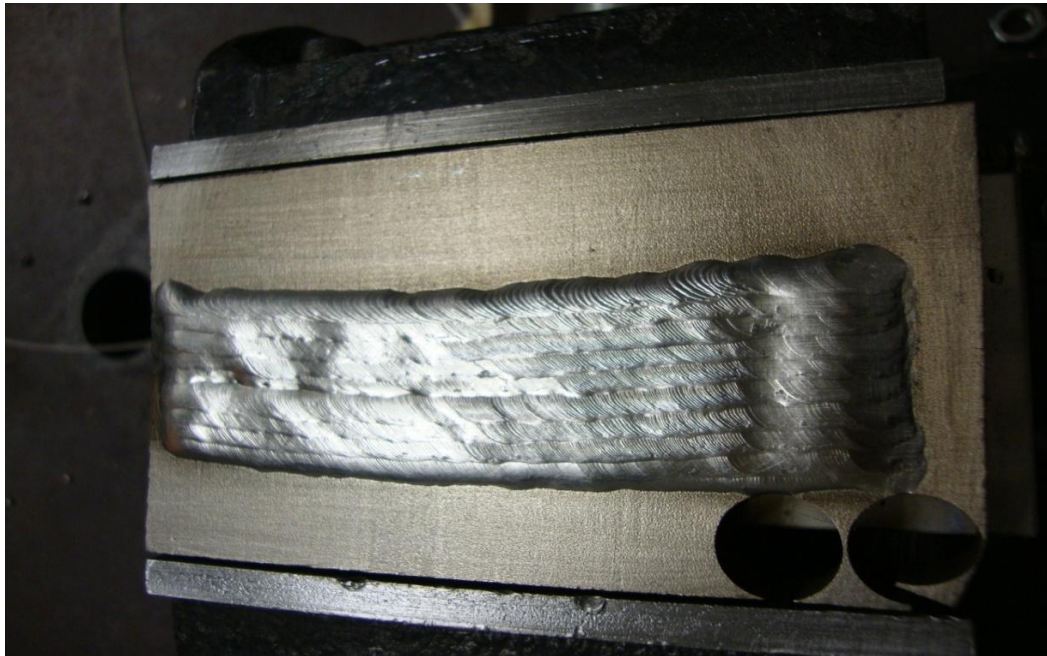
RECTANGULAR WELD BLOCK
